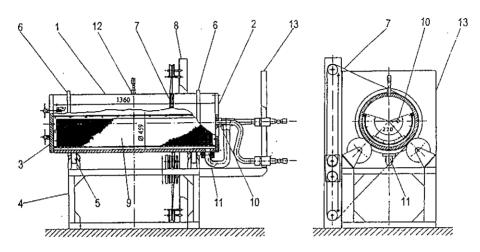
Schematic diagram of the rotary nutsche (RN filter): 1 – cylindrical shell; 2,3 – circular covers; 4 – steel frame; 5 – wheels; 6 – circular strips; 7 – steel rope; 8 – pneumatic mechanism; 9 – plastic grid; 10,11,12 – pipe couplings; 13 – cover plate
